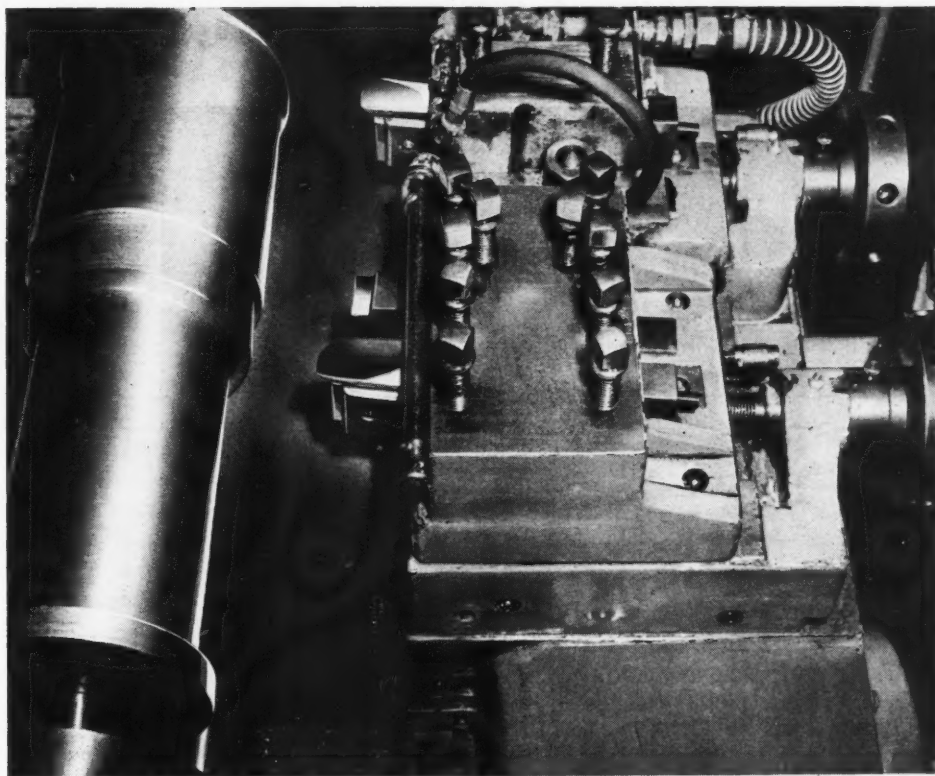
Tool set-up used in double-end, center-drive lathe for performing finish-turning operations on both ends of railway car axles
